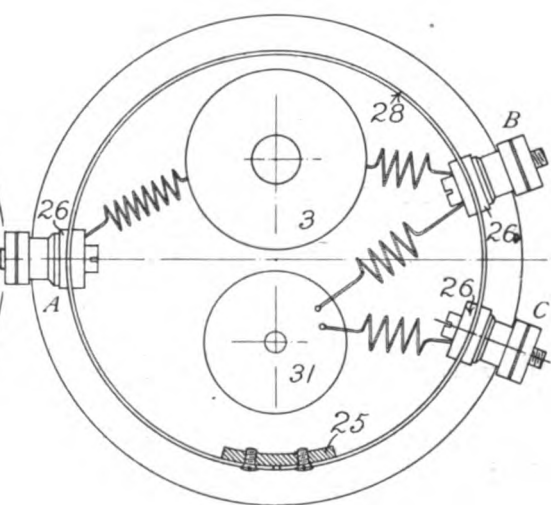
FRONT VIEW: DIAL REMOVED, SHOWING CONNECTION OF RESISTANCE COIL.
